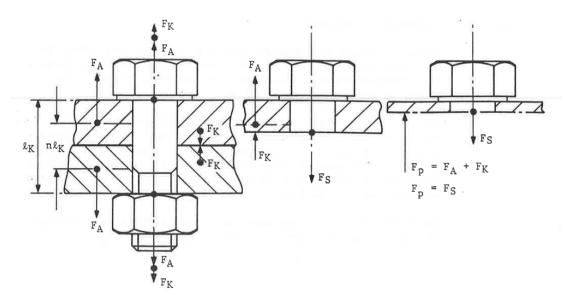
Tension joint loading planes and the forces acting within the joint [1]
